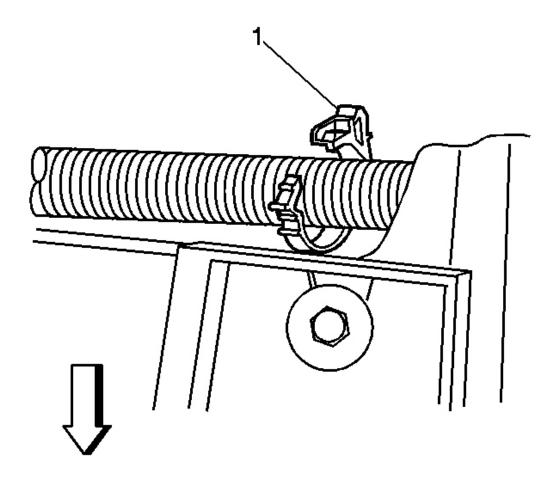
Disconnecting/Reconnecting Headlamp Wire Harness Retaining Clip
